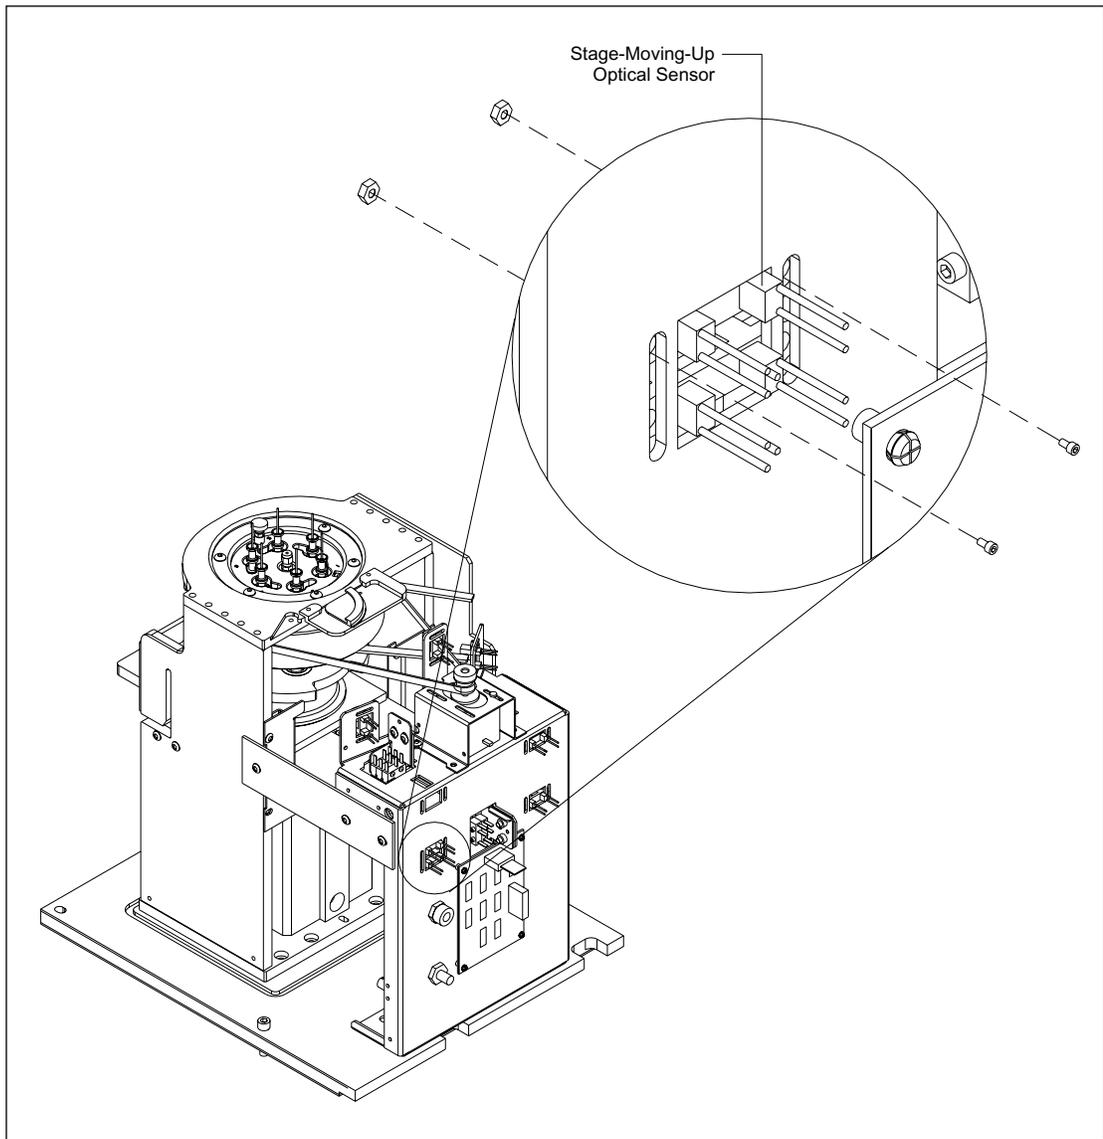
Anode Stage-Moving-Up Optical Sensor Mounting.
